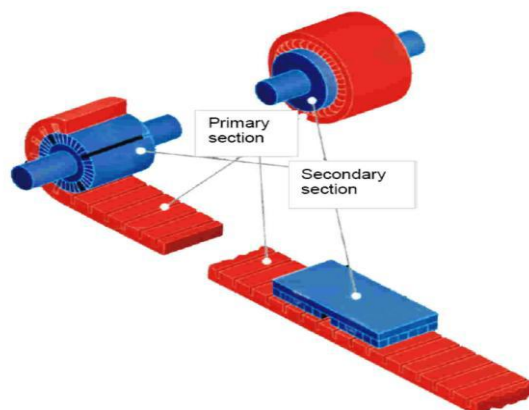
Imaginary process of splitting and unrolling a rotary machine to produce a linear motor [81]
